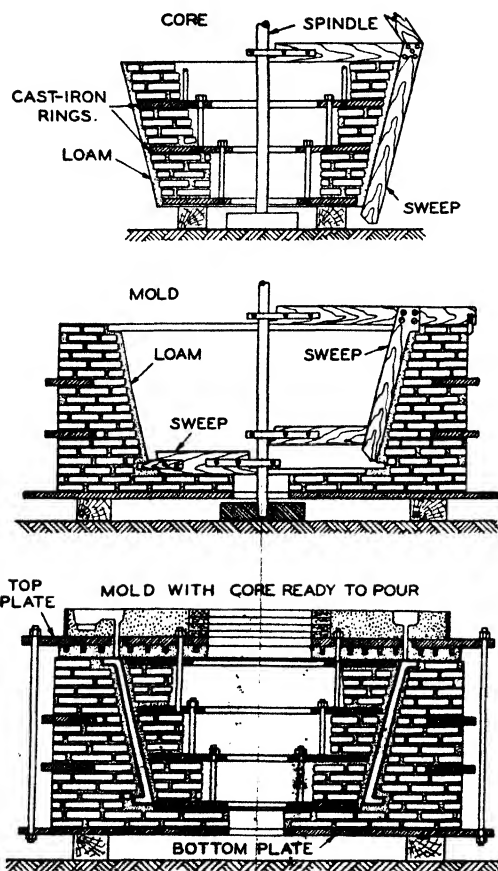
CONSTRUCTION OF LOAM MOLD
